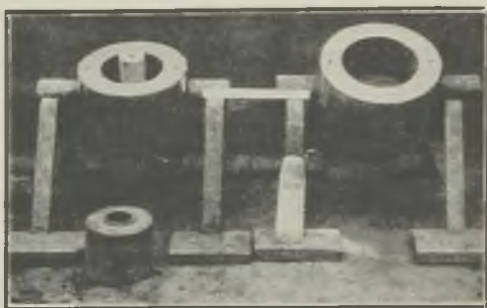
A PAIR OF MOULDS, ONE CARRYING THE CORE, TOGETHER WITH THE FINISHED CASTING.
